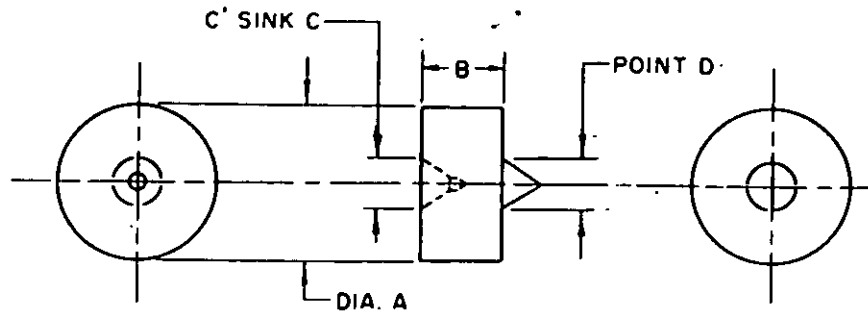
Type XIII, class 3, puller adapter, mechanical, gear and bearing, spacer.
